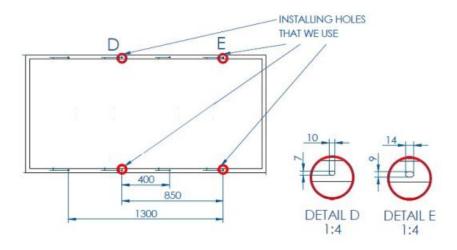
Mounting holes schematic of the single module for the 2V installation method
